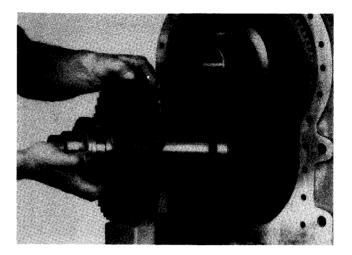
Remove idler shaft assembly. NOTE: The 6 & 8 speed transmission will have two gears and a heavier front bearing.
